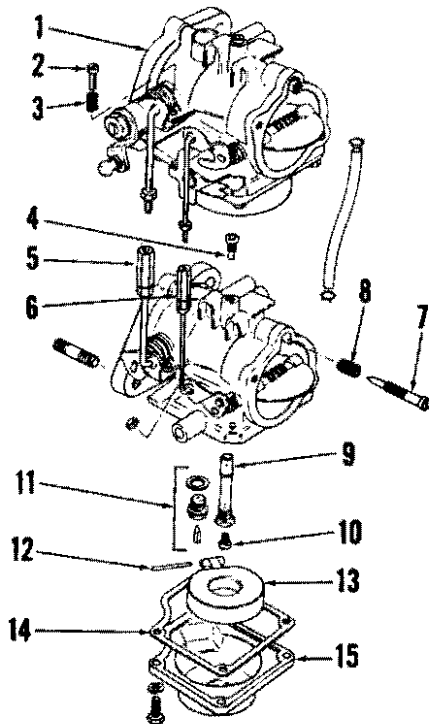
Exploded view of Mikuni carburetors typical of all models.
